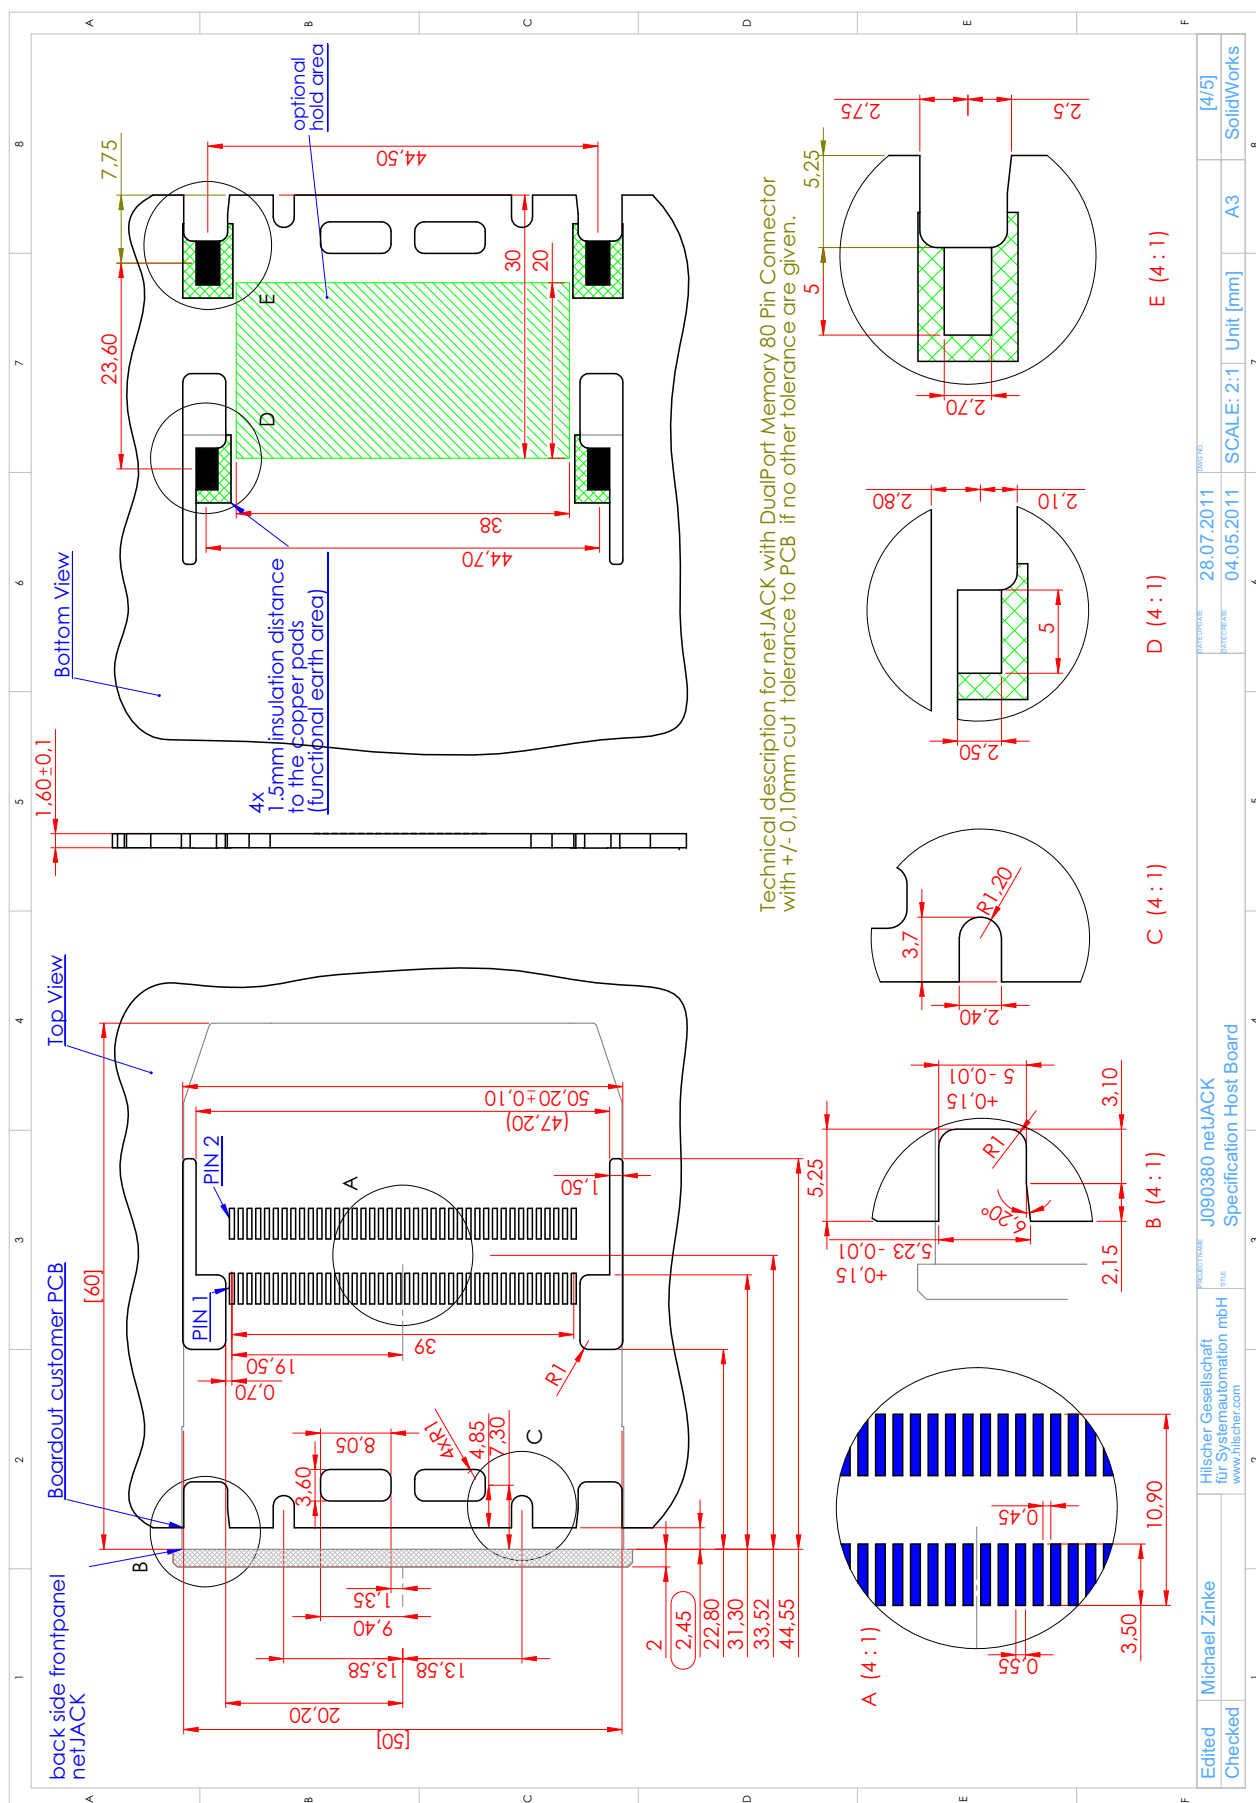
Dimension of Carrier Board for netJACK with Dual-port Memory 80 pin Connector
